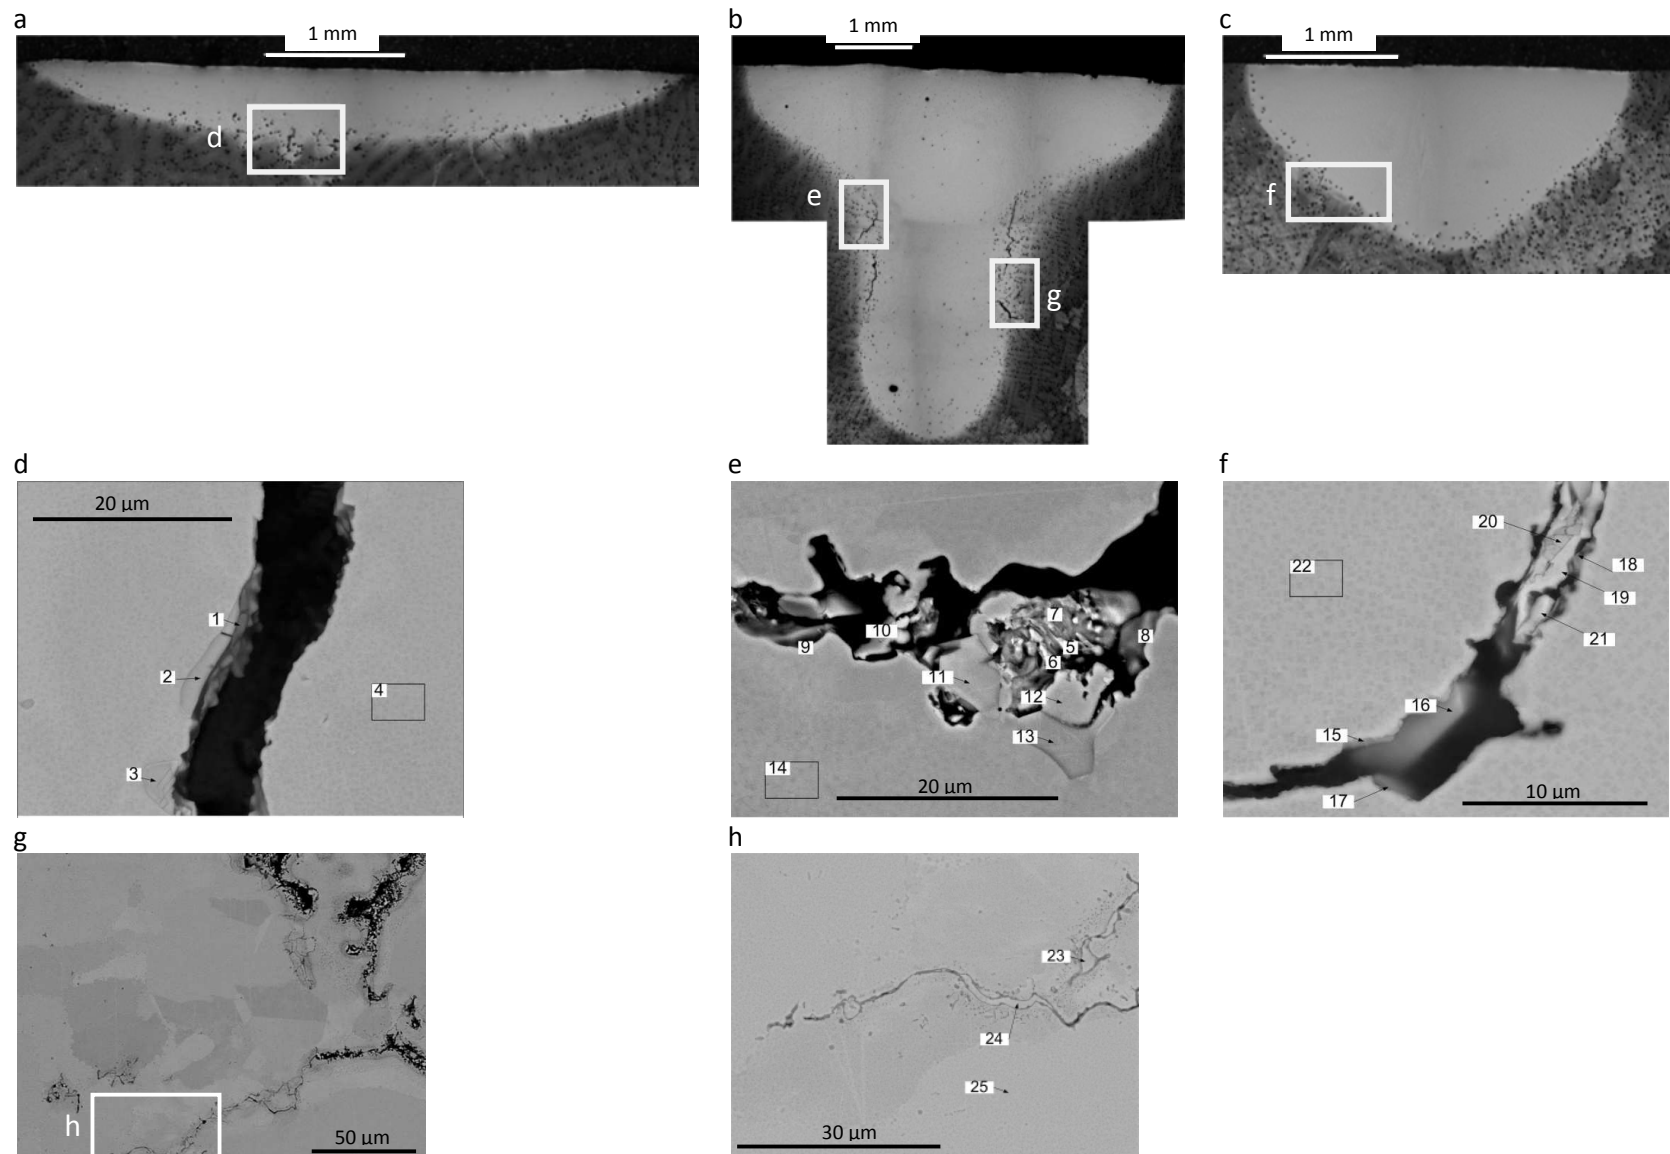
Macrographs from as-welded samples: (a) low (0.11) aspect ratio (beam diameter = 5 mm, power = 2.5kW and welding speed = 2000 mm.min⁻¹); (b) high (0.83) aspect ratio (beam diameter = 0.7 mm, power = 2.6 kW and welding speed = 400 mm.min⁻¹); and (c) optimal (0.55) aspect ratio (beam diameter = 1.71 mm, power = 3.44 kW and welding speed = 2000 mm.min⁻¹). SEM images of liquation cracks observed in as-
